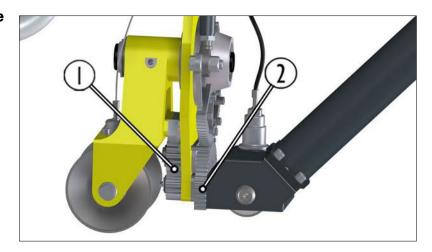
Lubrication point gear wheels swivel mechanism (operator's side)
